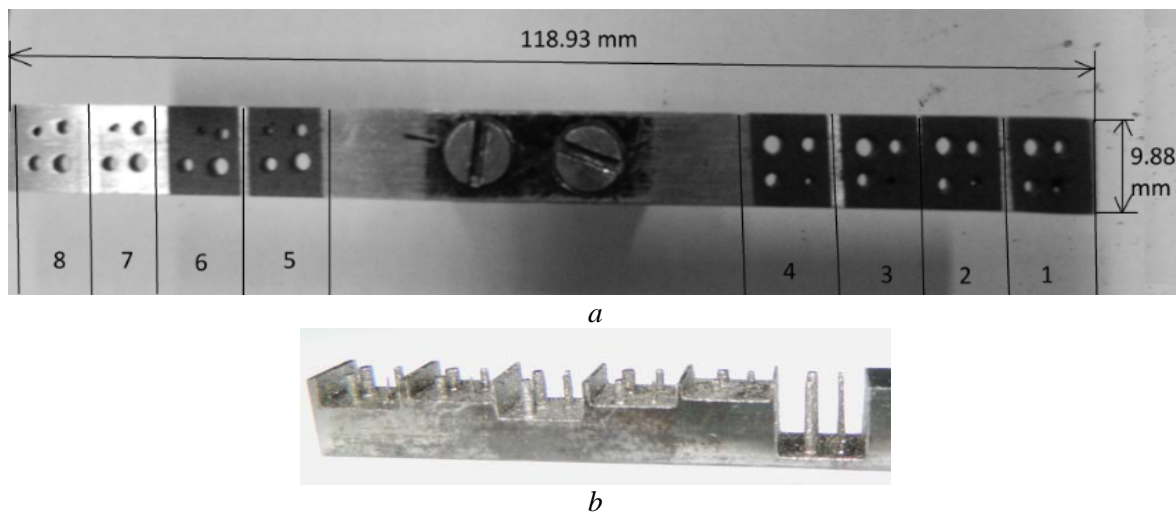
Copper tool electrode used within experimental tests (a) and image of the test piece (b)
